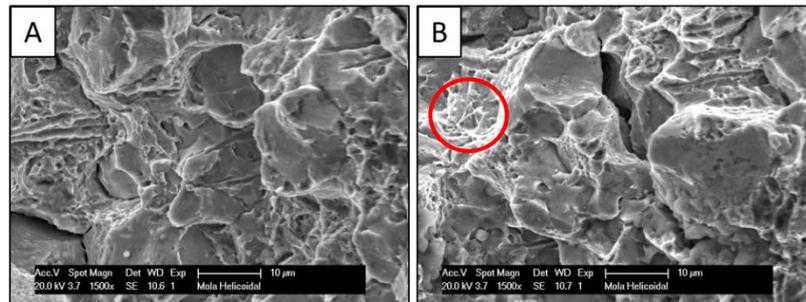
Mixed fracture mechanism of brittle intergranular and dimples.
